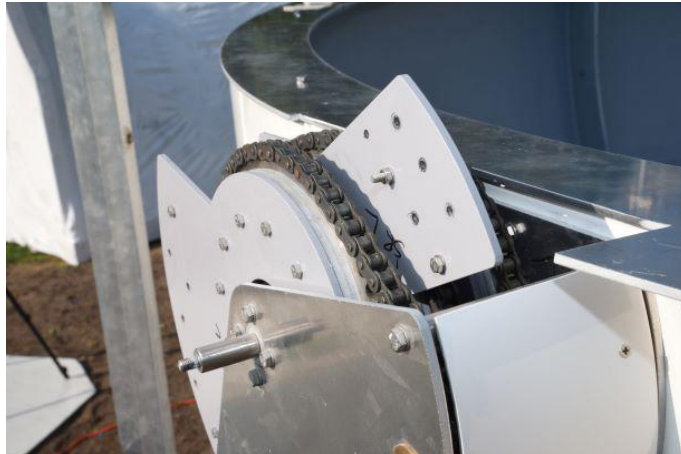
washer and fixing screws in the shutter mounting handles and handle position before its installation
